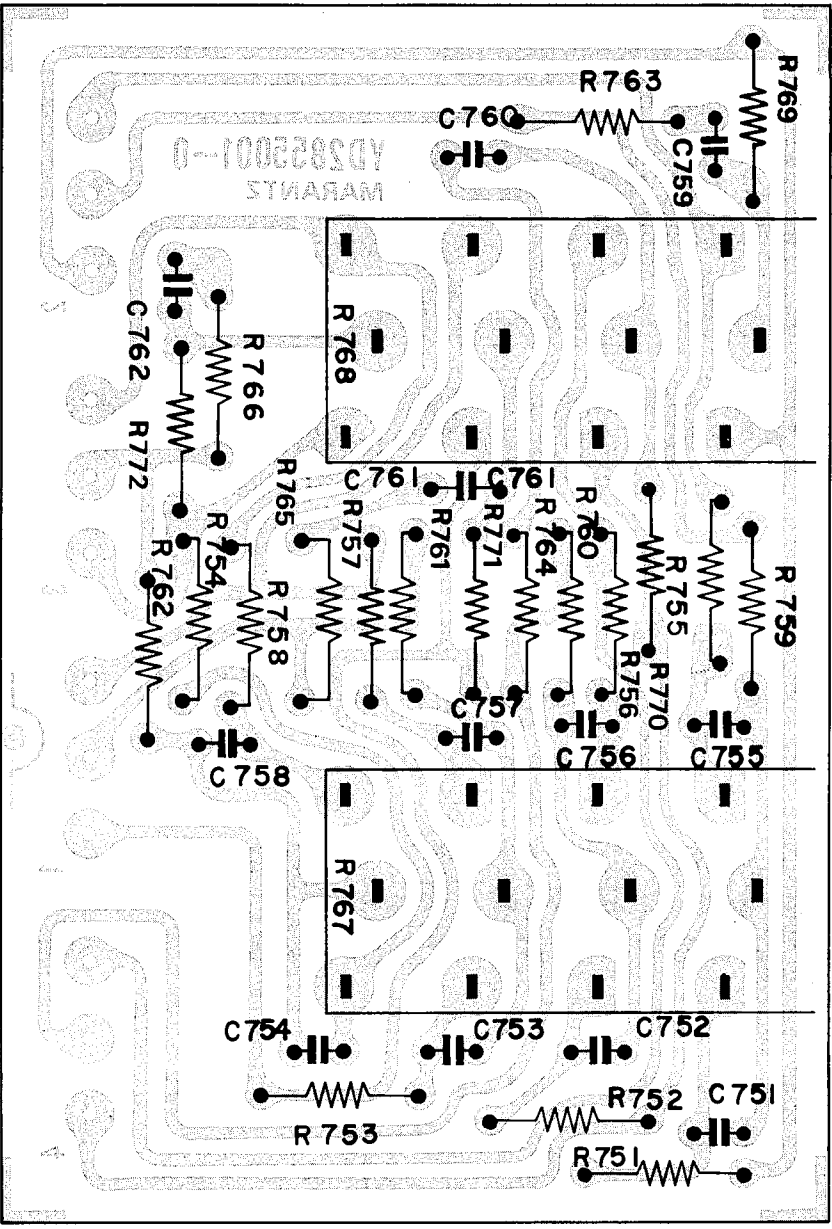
Phono Equalizer Amplifier Assembly P700 Component Locations
